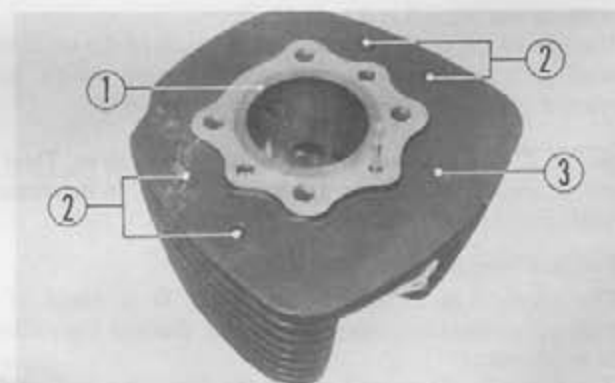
① Sleeve ② Cushion rubbers ③ Cylinder
